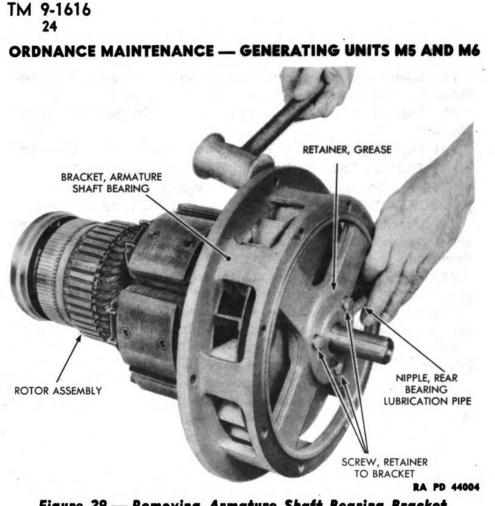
Removing Armature Shaft Bearing Bracket from Rotor Assembly
